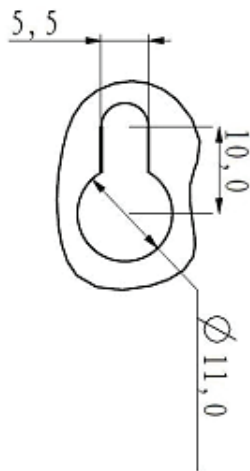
Dimensions: top side (KBox C-104-TGL-0)
